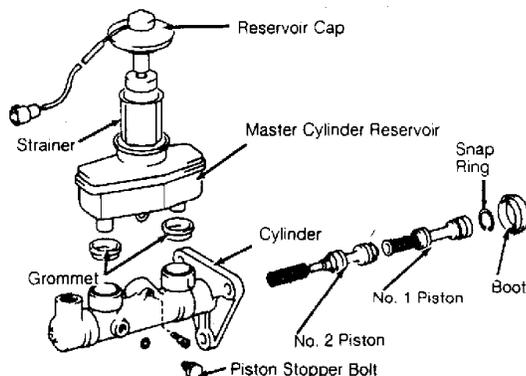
Exploded View of Typical Master Cylinder Assembly
